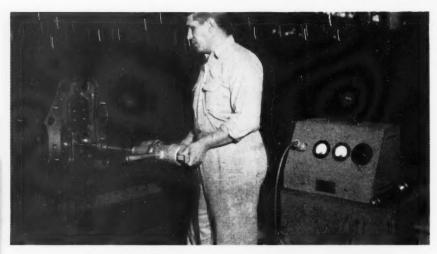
Using a Franklin tube expander with a Dudley electronic control to expand a copper tube in the cylinder head to seal off the water passage.
